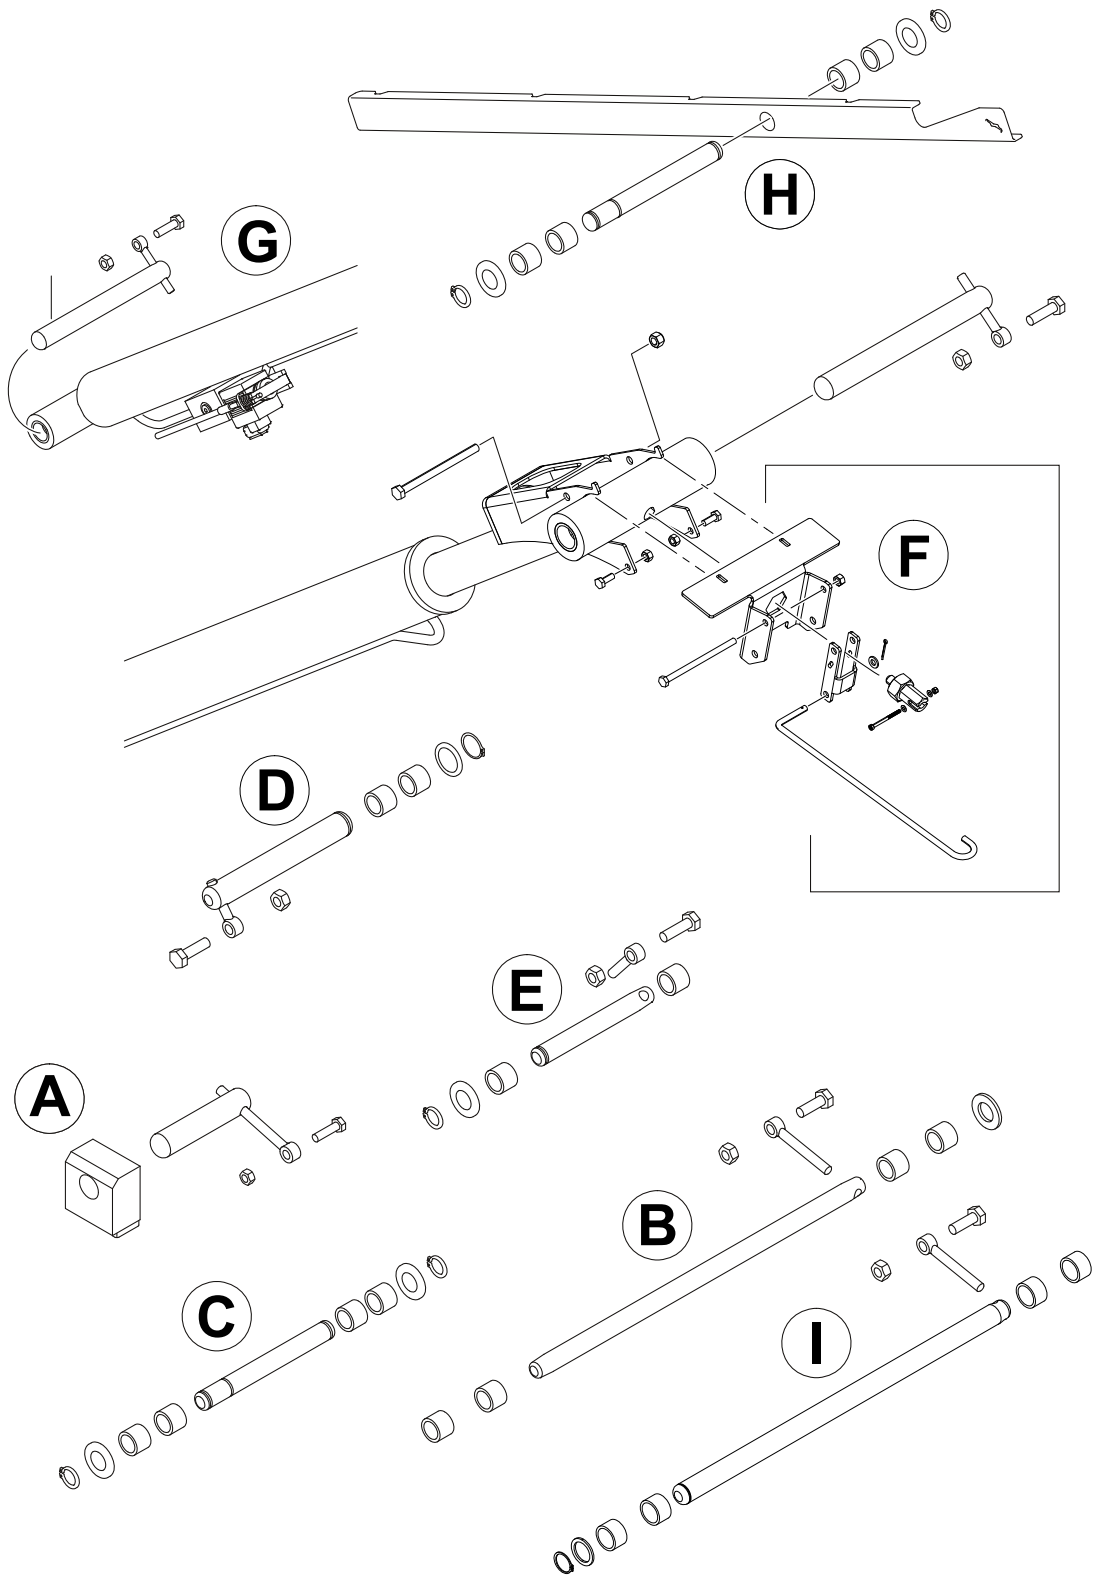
1932RS/6RS - Scissor Arm Assembly - Pin Configuration
